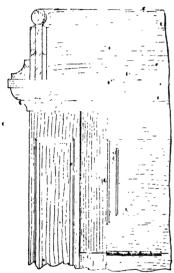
Enlarged Detail of Top of Music Cabinet.
